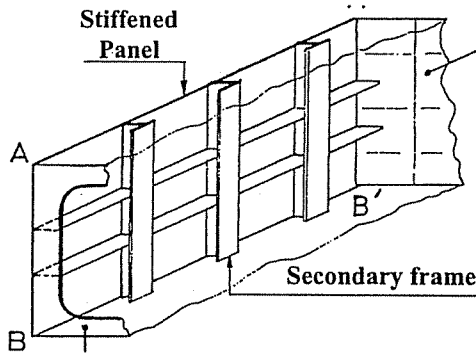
A stiffened plate with frames and longitudinals (between two bulkheads)
